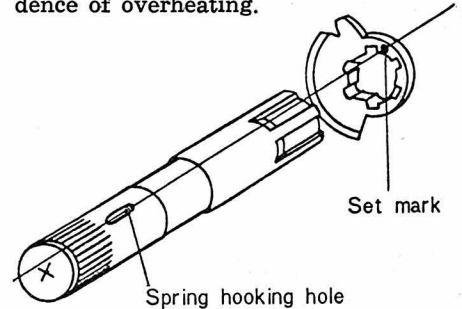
Mark on kickstarter gear should be aligned with spring hooking hole as shown.
